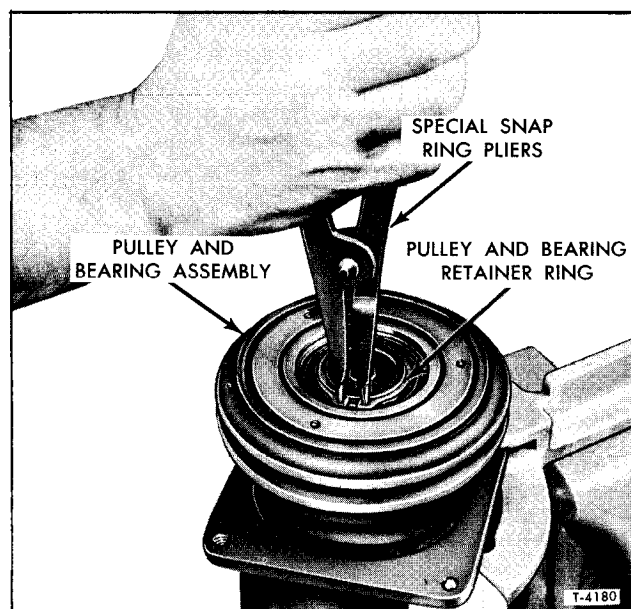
Removing Pulley and Bearing Assembly Retaining Ring
